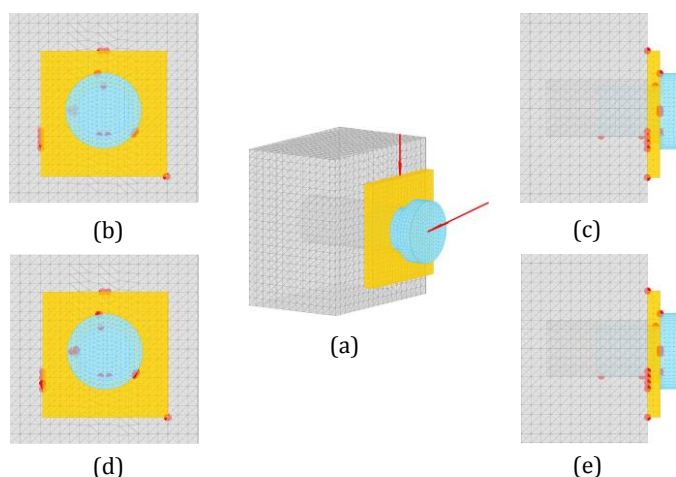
Assembly of 3 parts (a) initial positions and assembly loads (b, c) assembly result of LCC method (d, e) assembly result of DM method.
